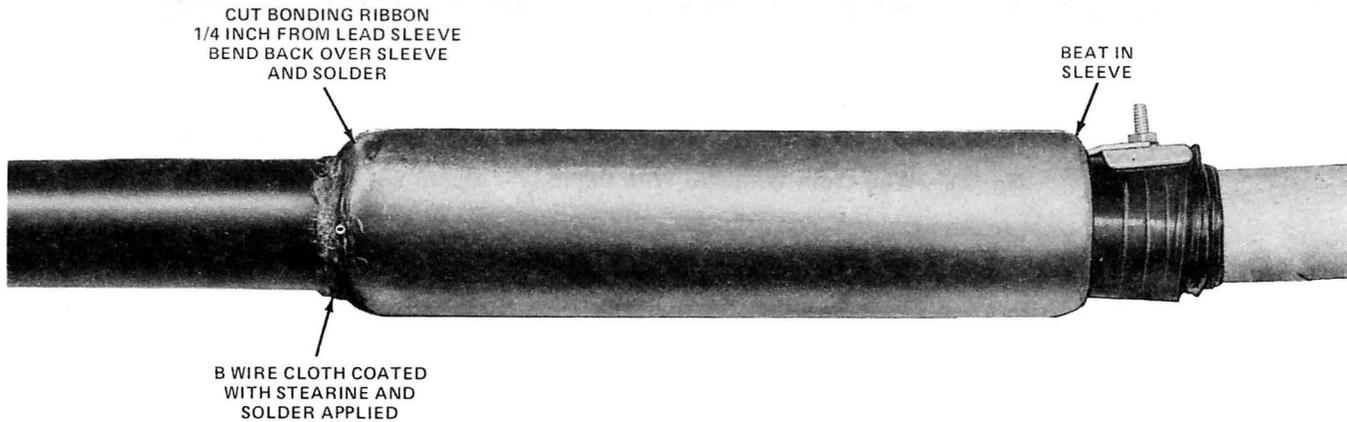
Auxiliary Sleeve Beat-In and Solder Applied
